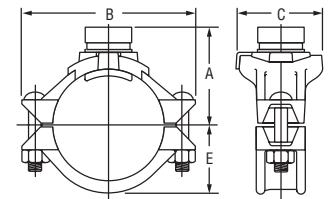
BRANCH OUTLET WITH GROOVED BRANCH (TEE CONFIGURATION)
